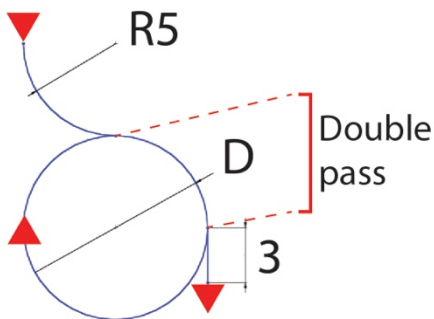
Modified machining path for the entrance-exit defects reduction. D is the circular trajectory diameter, adjusted according to the actual jet diameter.
